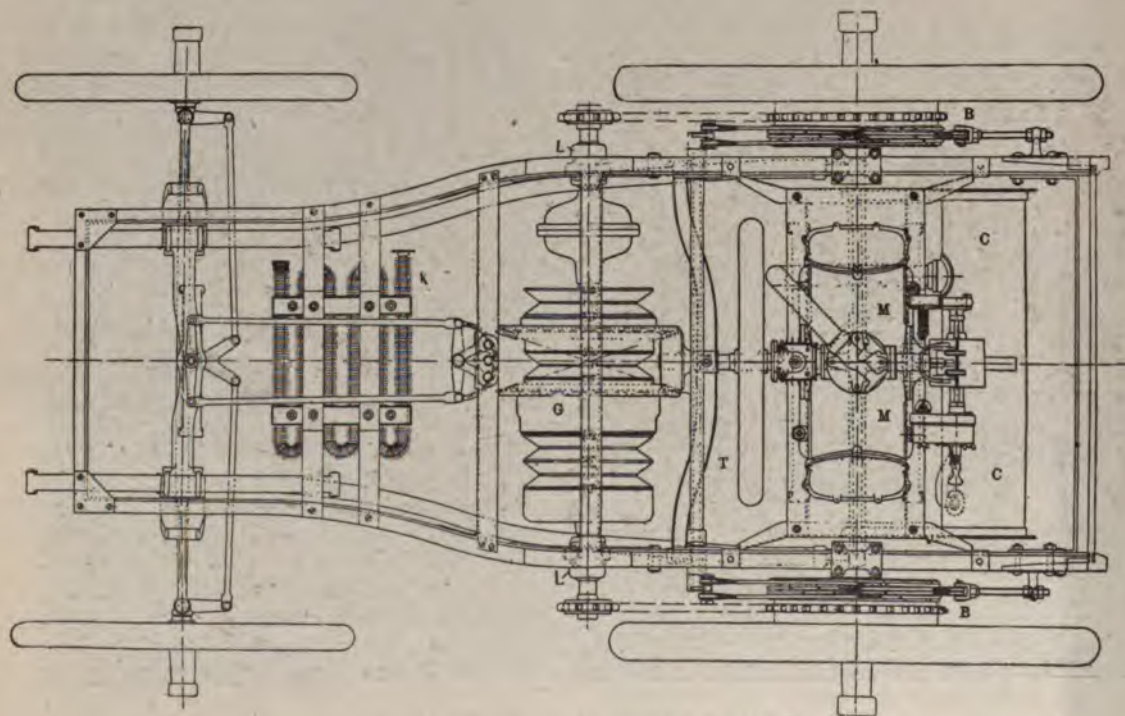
PLAN OF FRAMING AND MECHANISM.
